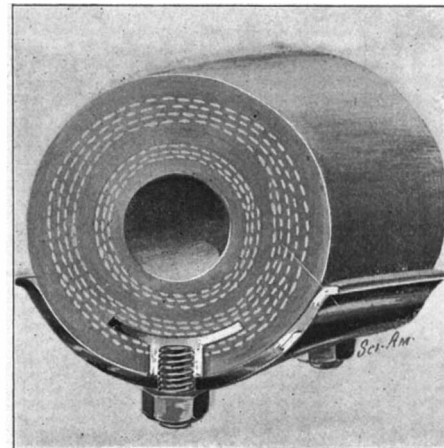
Single-Tube Tire, Showing Method of Attachment.
